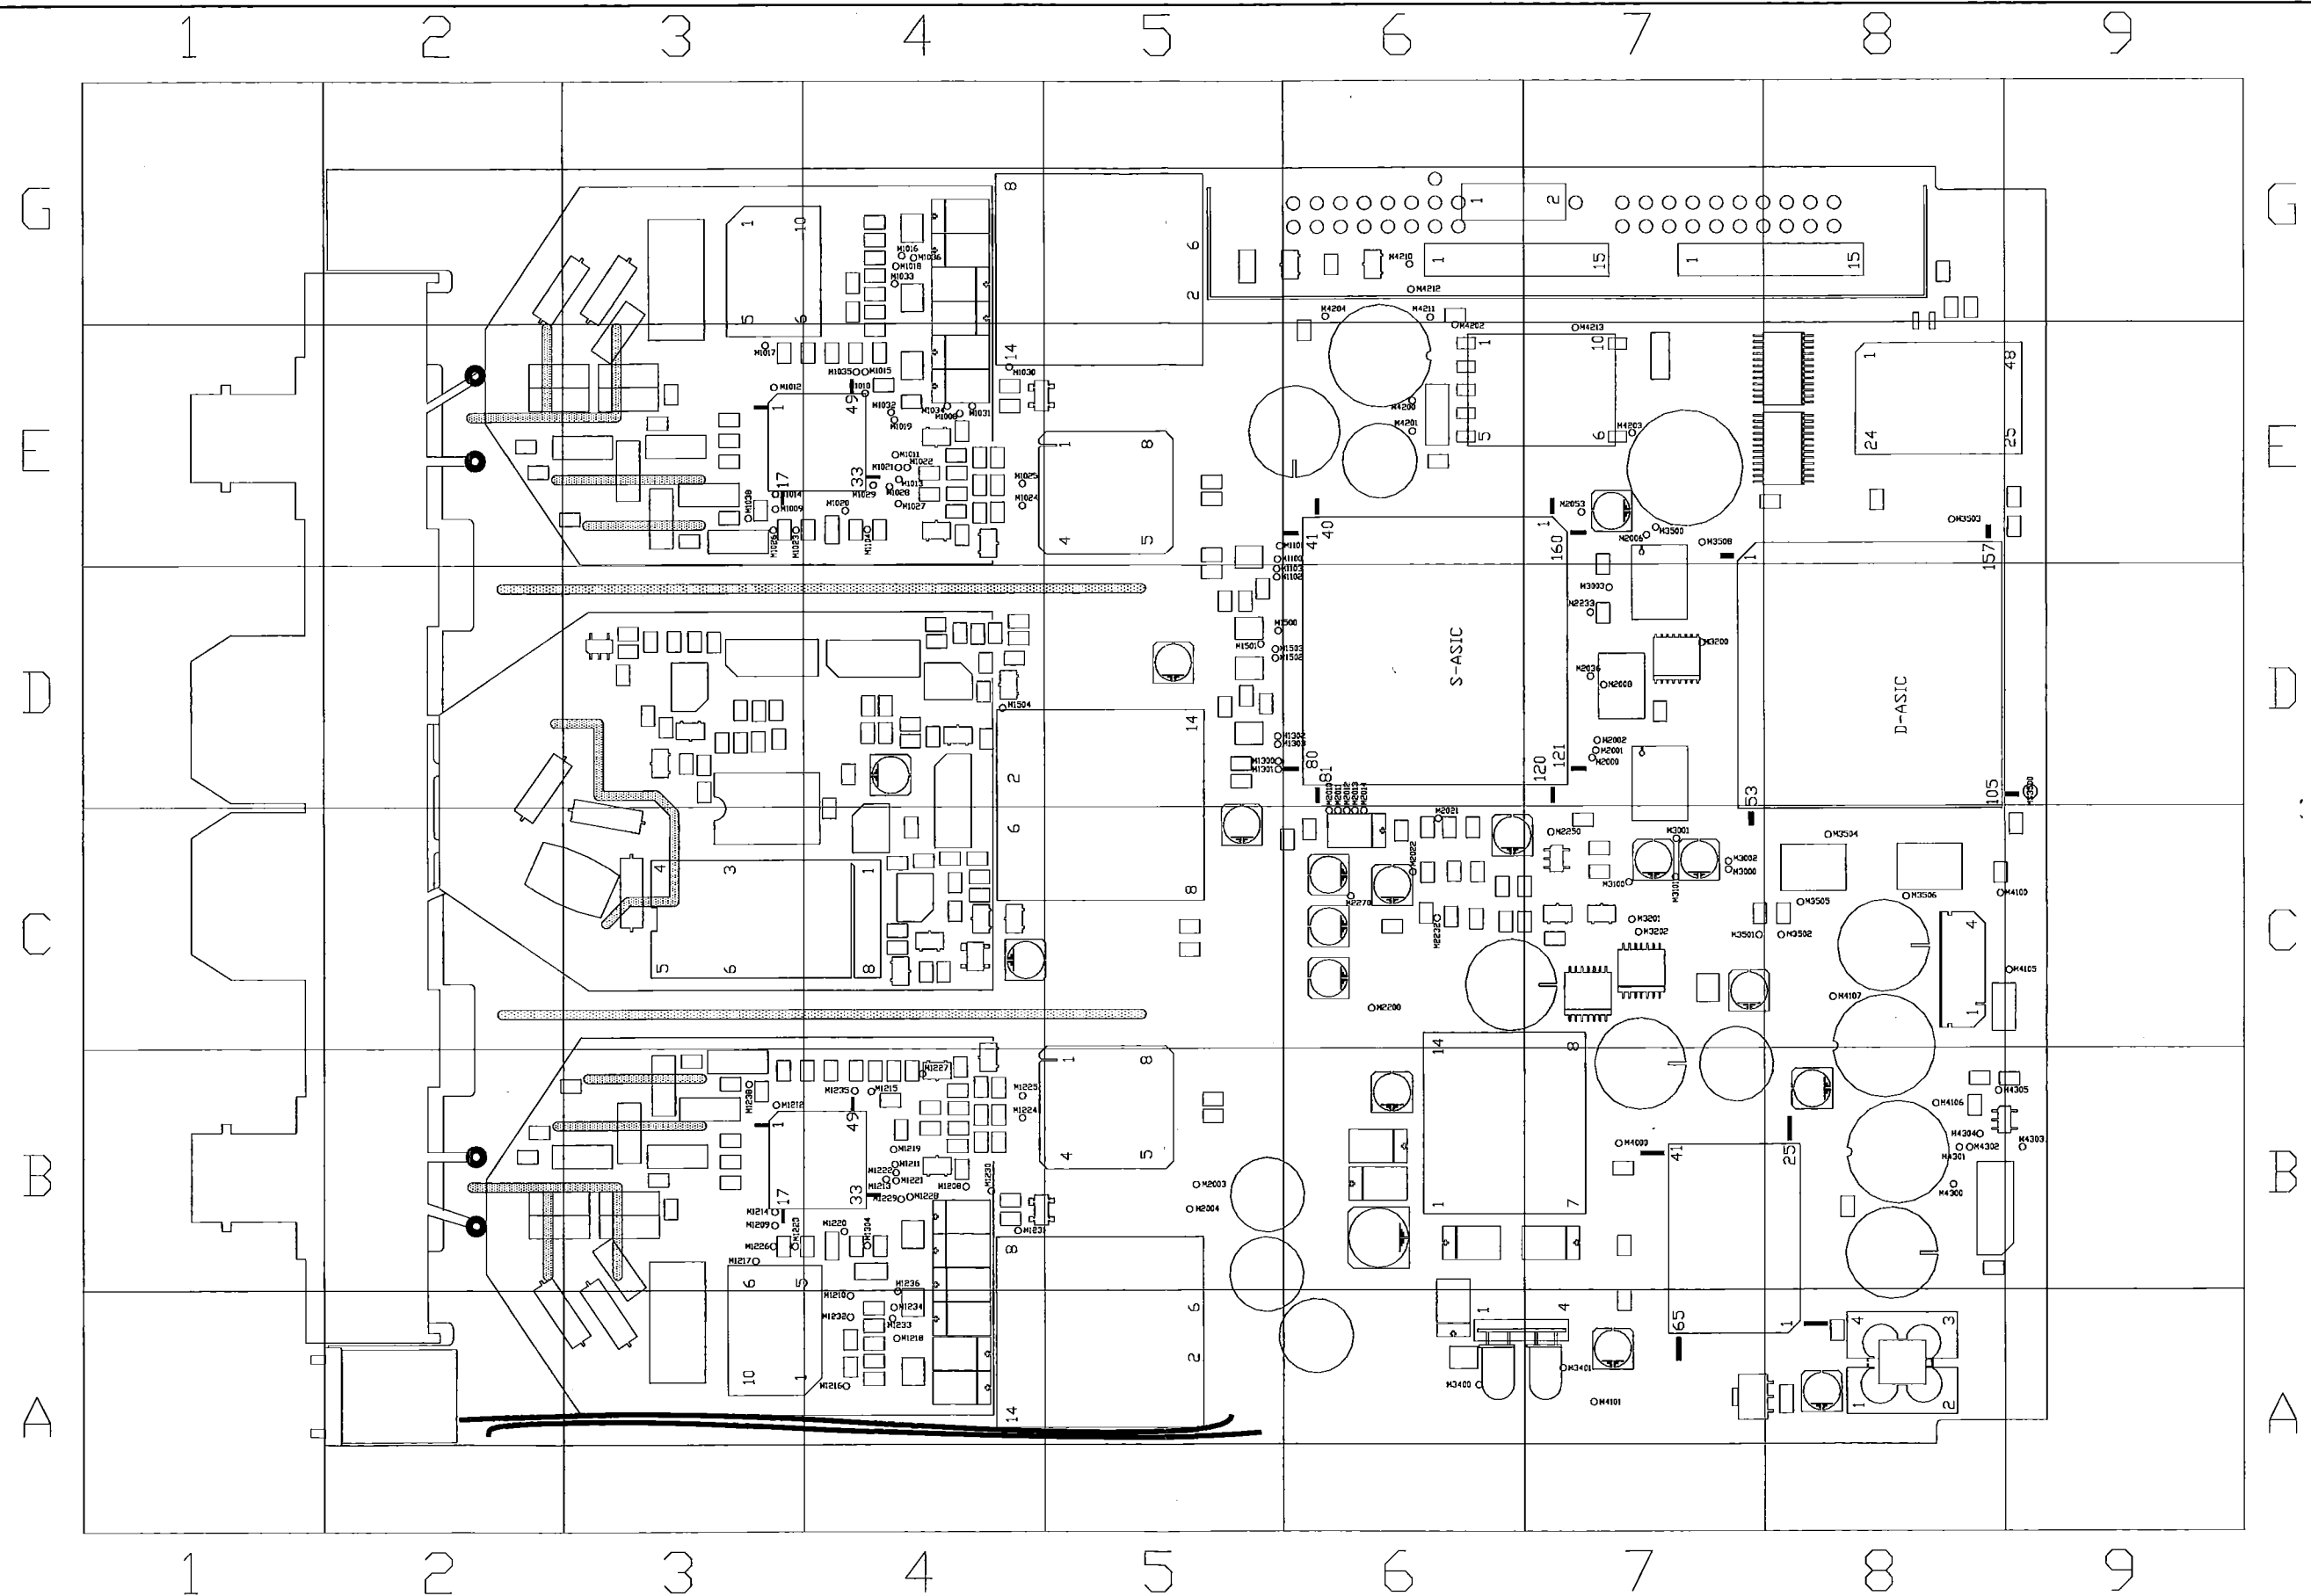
Main PCA Top View Test Spots PCB Version 6
